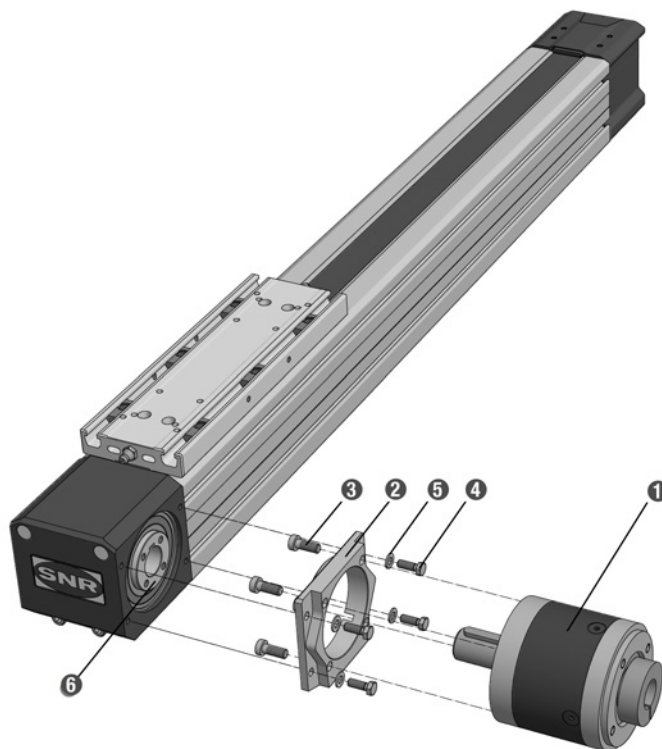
Form-fitted mounting of planetary gearboxes on Linear Axis with toothed belt drive
